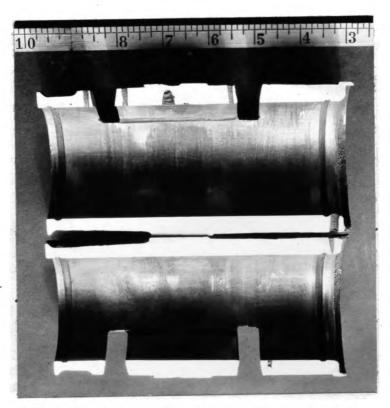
Bronze Bearing Having Inadequate Oil Distributing Groove.
